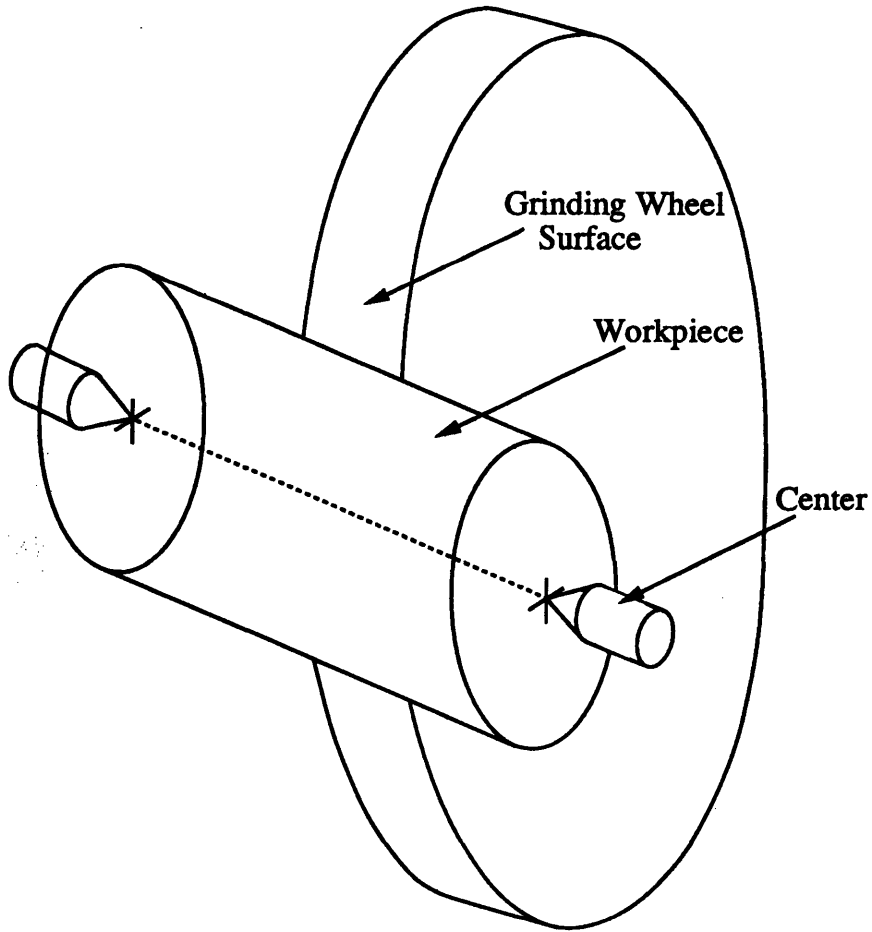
Center-type Grinding where Grinding Wheel is kept a constant distance from the cone to cone centerline.
